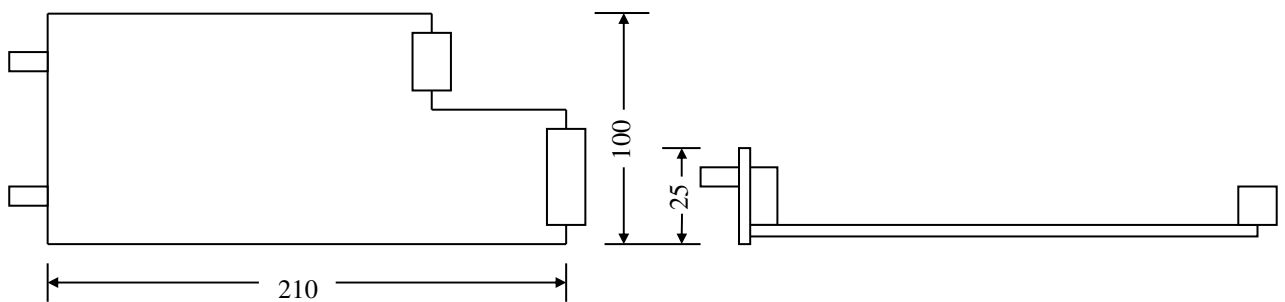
STANDARD CARD MOUNTING DIMENSIONS
